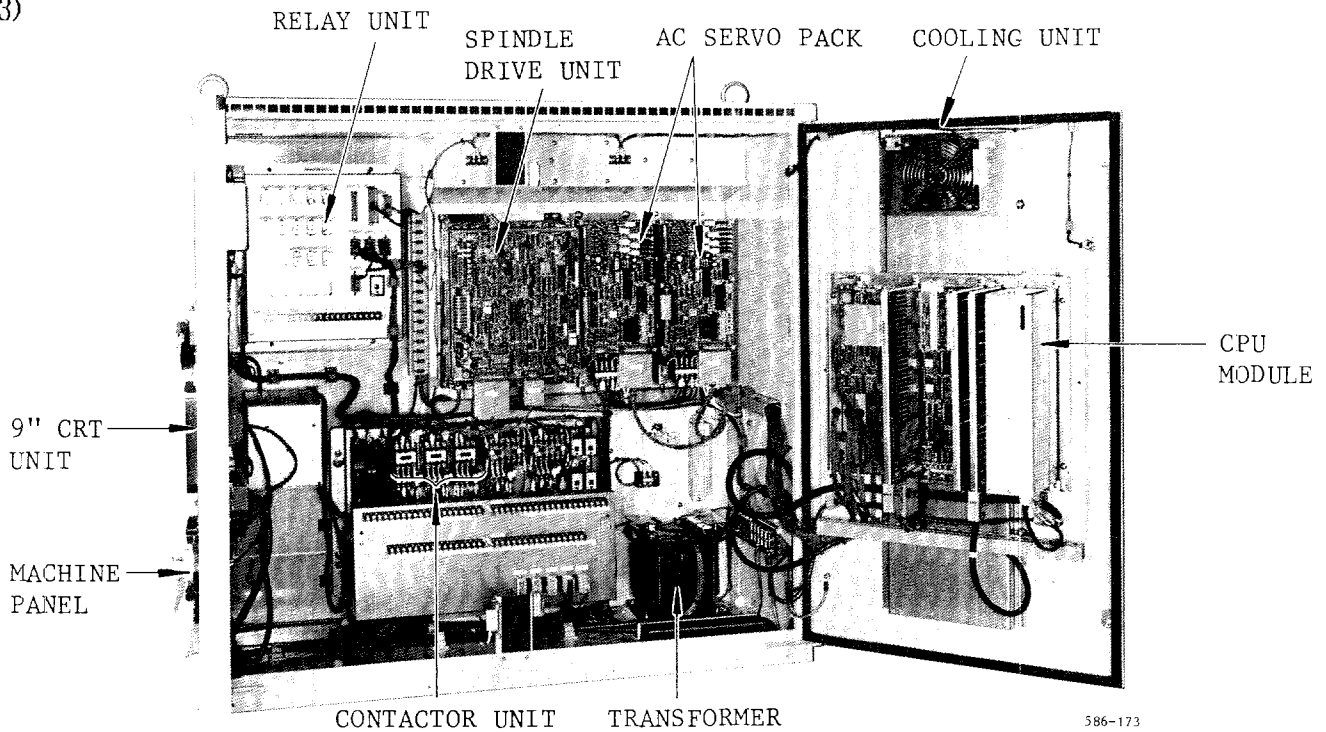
Example of Unit Assembly with High Voltage Units
